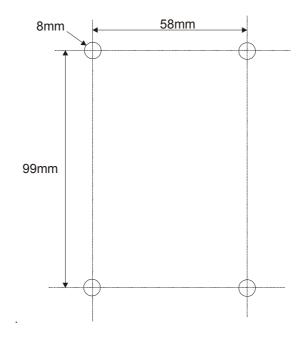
BSR mounting bracket dimensions for the four fixing holes
